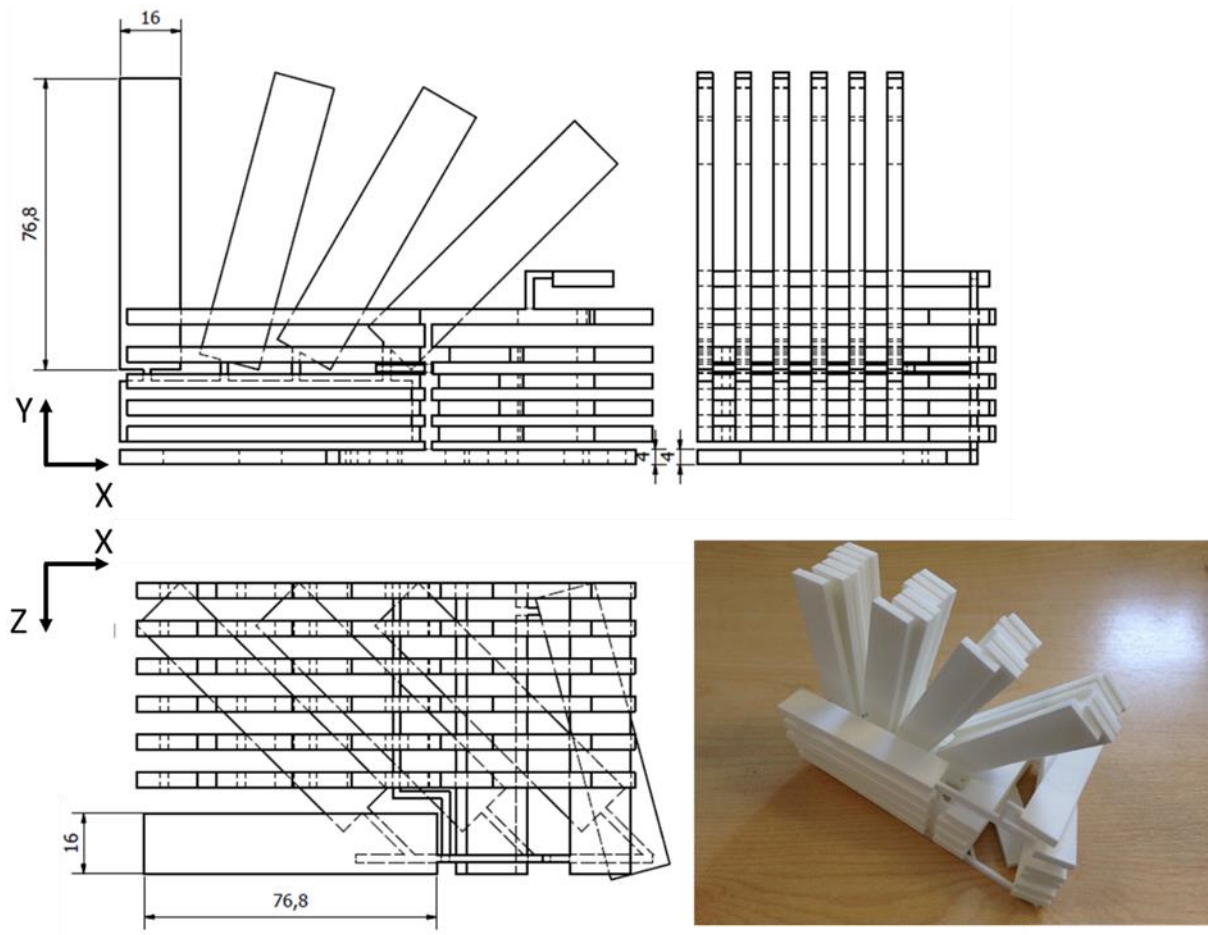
Three Dimensional Three Point Bend Test Specimen.
